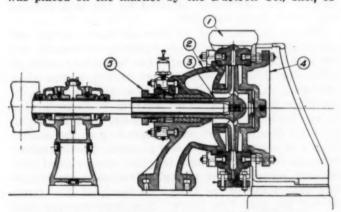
ASSEMBLY DRAWING OF DURIRON CENTRIFUGAL PUMP
